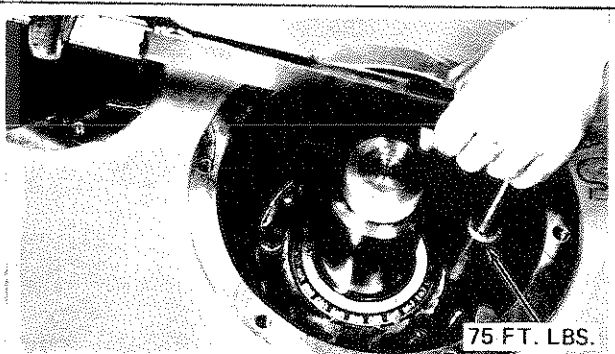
Installation Of Drum And Drum Shaft (Sheet 1 of 3)
